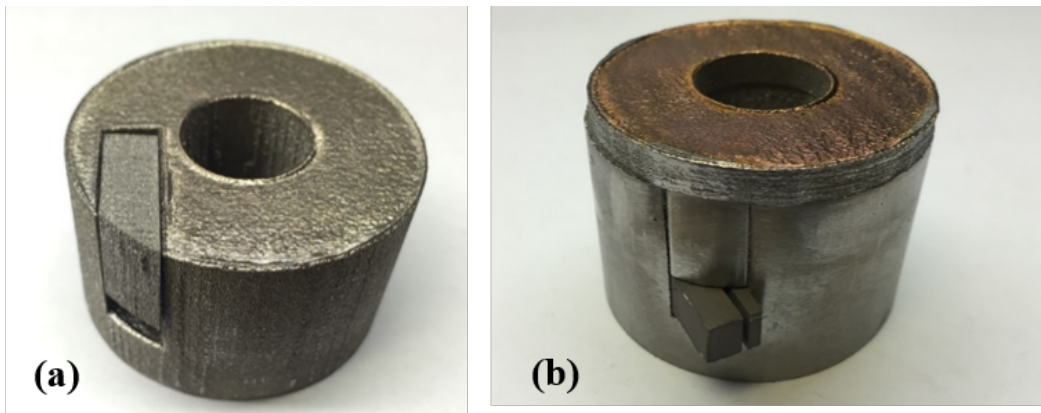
Smart tube fabrication using machinable alumina package and modified design of sensor packaging.
